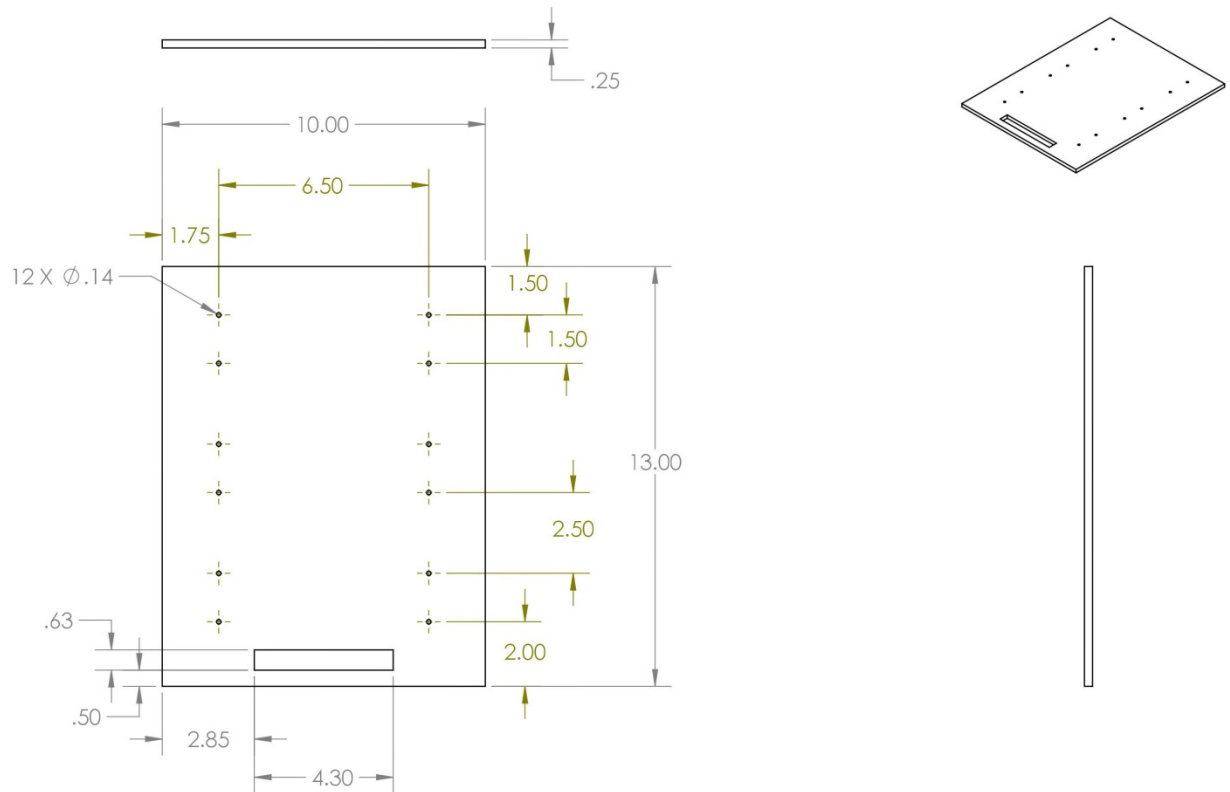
Top Layer View of Complete the Circuit Board with dimensions
